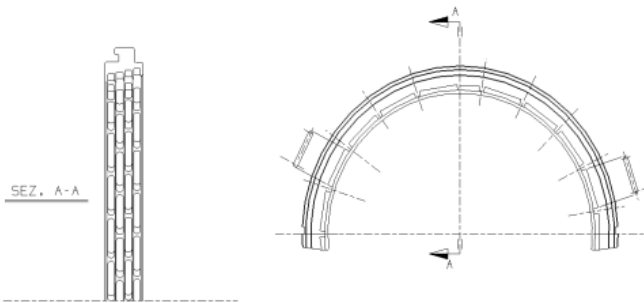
Webbed Seal Installed on Impeller Shrouds in Final Configuration.
